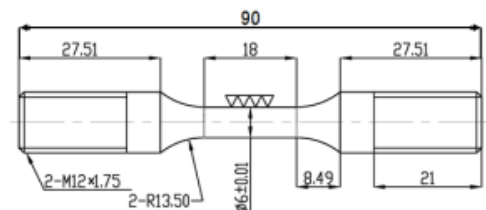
Shape and dimensions of cylindrical low cycle fatigue testing specimen
